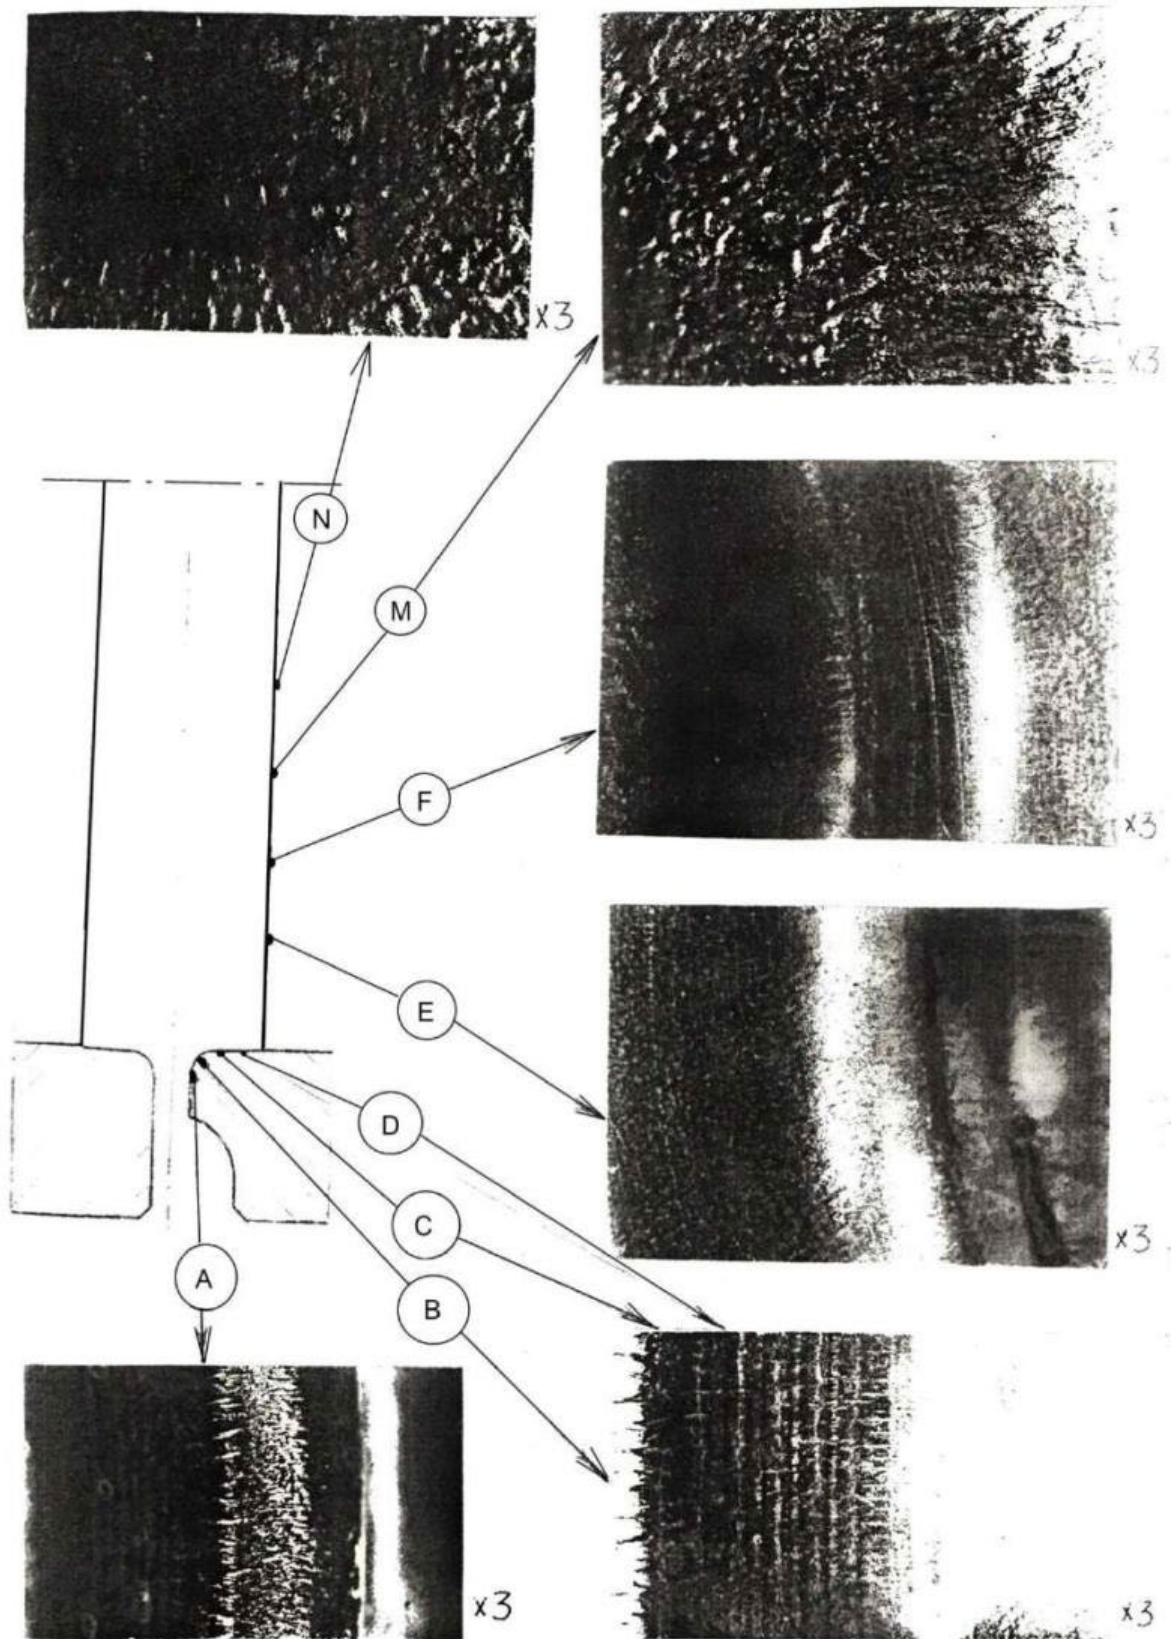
Damage surfaces corps And striker, hardened LTO
